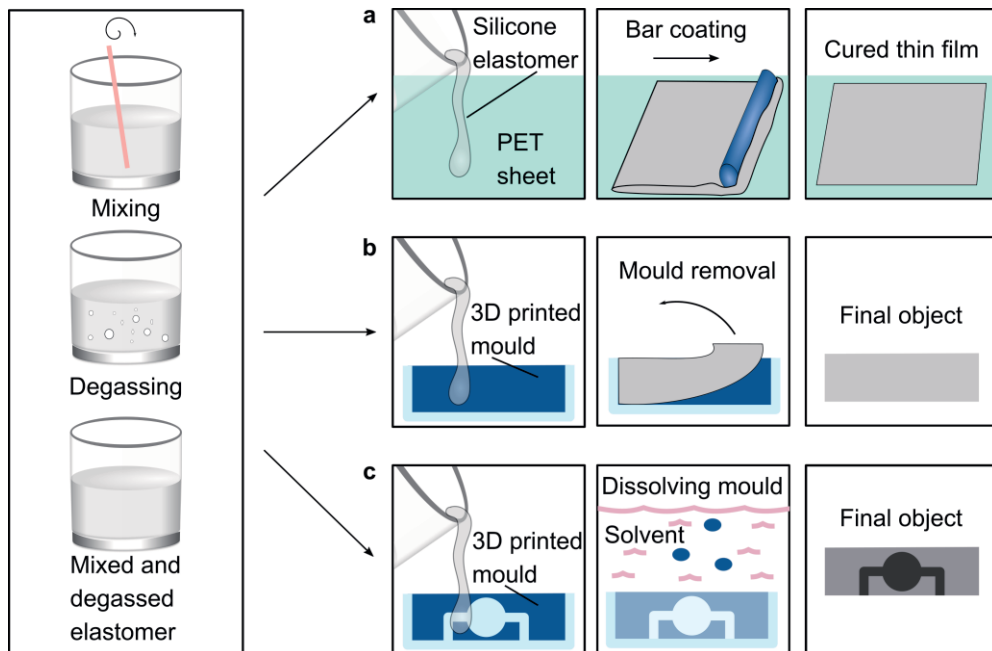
Two component silicone elastomer casting: parts are mixed and degassed before application. a) Uncured elastomer is poured onto a flat substrate and spread using a bar coater to form a thin film, b) uncured elastomer is poured into a 3D printed mould and cured elastomer piece is demoulded by tearing it from the mould, c) uncured elastomer is poured into a sacrificial 3D printed mould and the mould is dissolved by placing in into a solvent bath.
